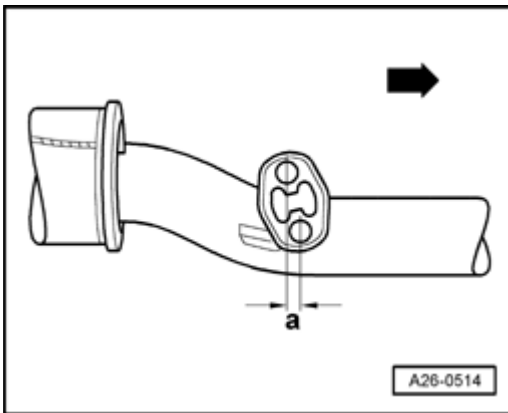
Pushing Front Section Of Exhaust System Toward Front Of Vehicle
